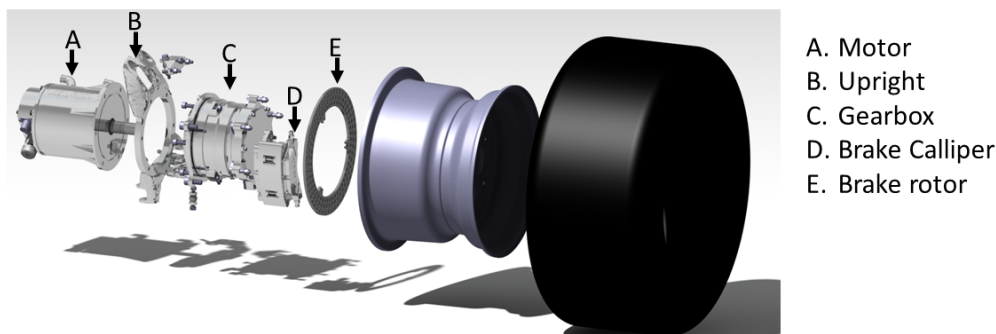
Exploded view of the current powertrain assembly for the CFS car
